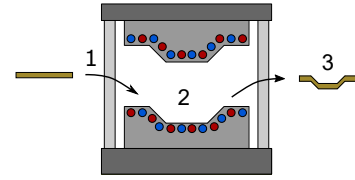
Schematic representation of the rapid variothermal mould forming process: 1) draping in the mould 2) heating up, consolidation and cooling down 3) demoulding.
